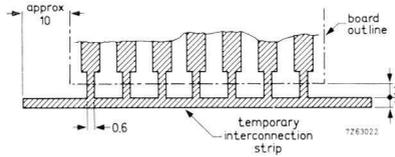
Interconnection strip outside PCB contour for plating-up direct edge-connector.
